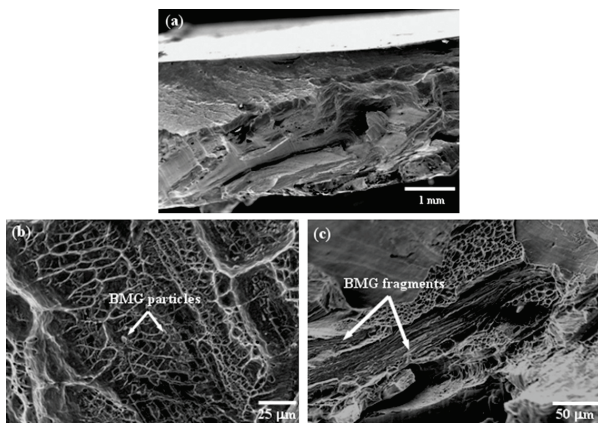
SEM images showing the tensile fracture surfaces of the BMG/copper joint (a) macro-view of the fracture surface; (b) magnified view showing BMG particles on the fractured plane; (c) magnified view showing the strip-like BMG fragments on the fractured plane.
